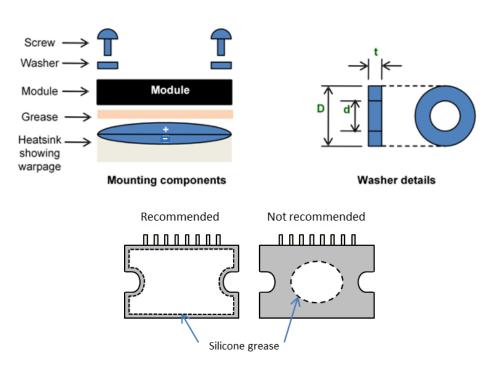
Module Mounting Details: Components; Washer Drawing; Need for Even Spreading of Thermal Grease
